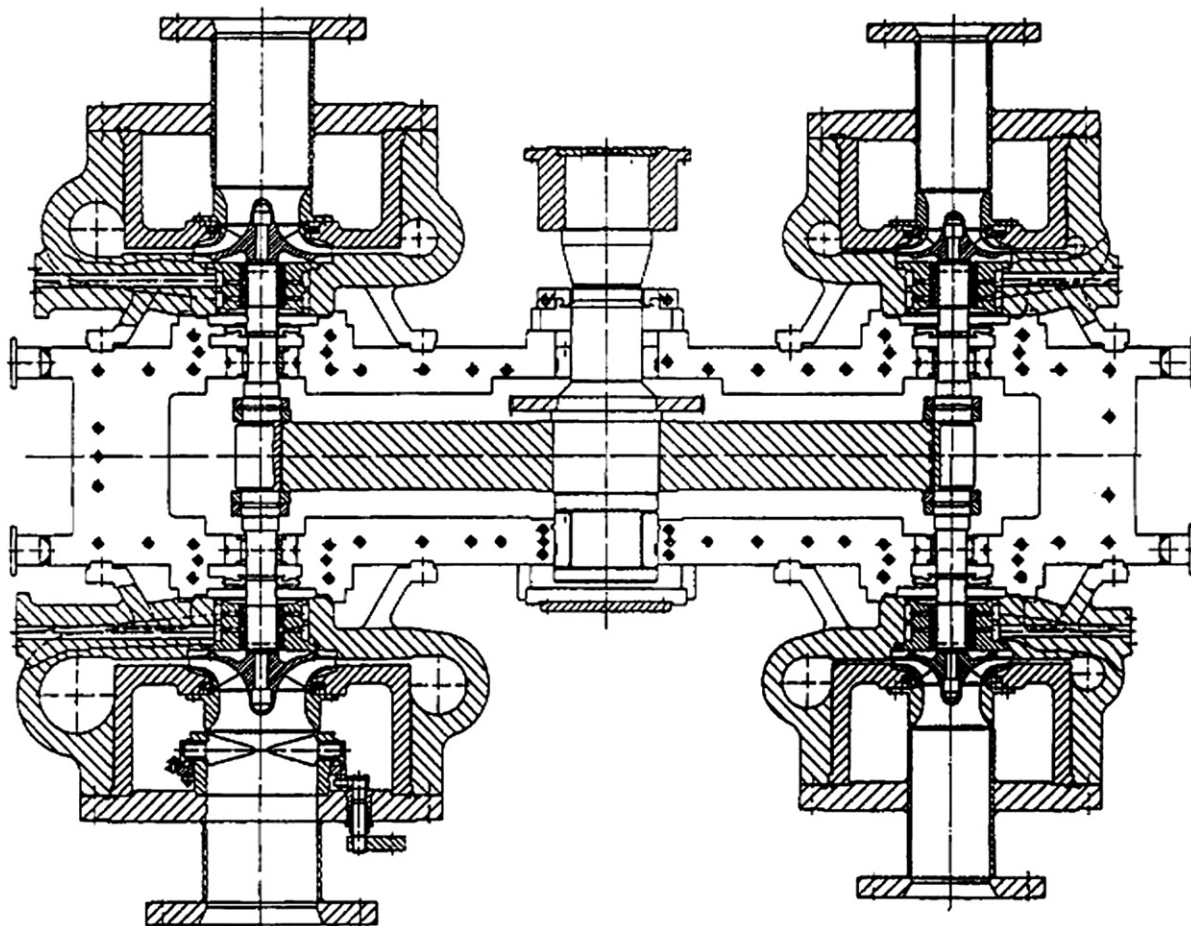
• 4 stage internal gear compressor (Courtesy of Demag Corp.)
